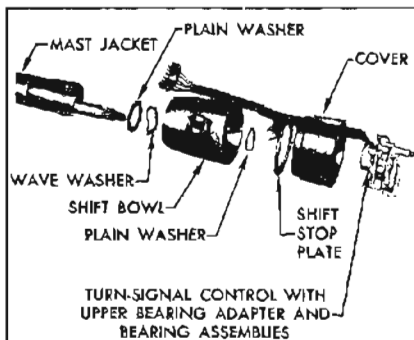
Disassembly of Upper Portion of Automatic Transmission Mast Jacket
